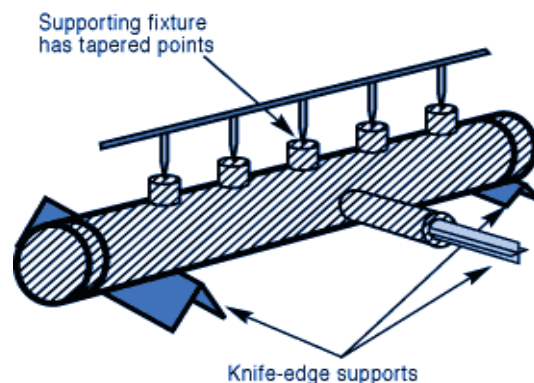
Knife-edge and pin-point fixtures used to reduce the amount of contact with a braze assembly.<sup>12</sup>
